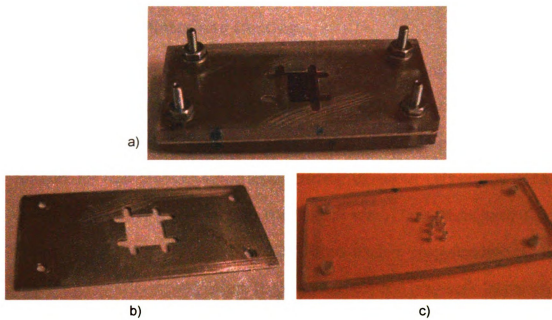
Mounting bracket for the silicon chip: a) assembly; b) middle aluminum plate; c) bottom plate with access holes.
